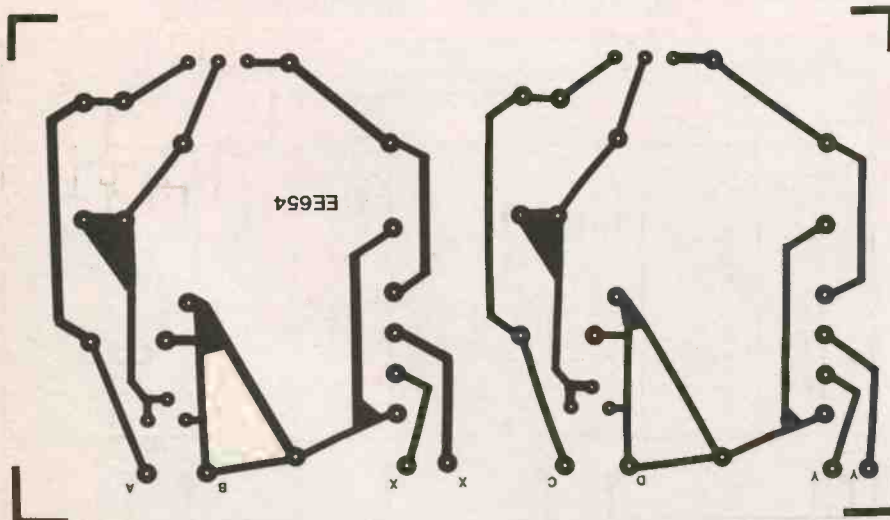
Printed circuit board component layout (left) and full size copper foil master pattern (above). Note the regulators are soldered on the track side of the board.
